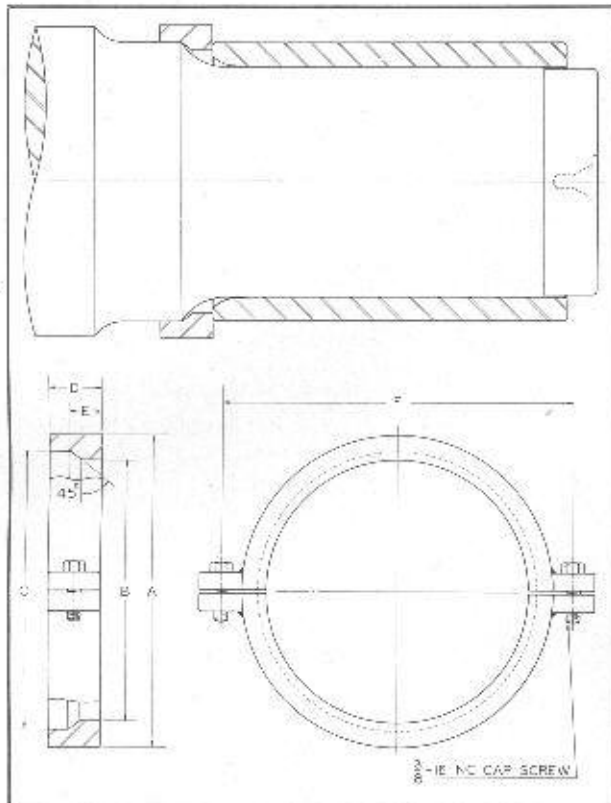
Design of split collar for properly locating the bearing inner race on the journal. Table of dimensions is shown below.
